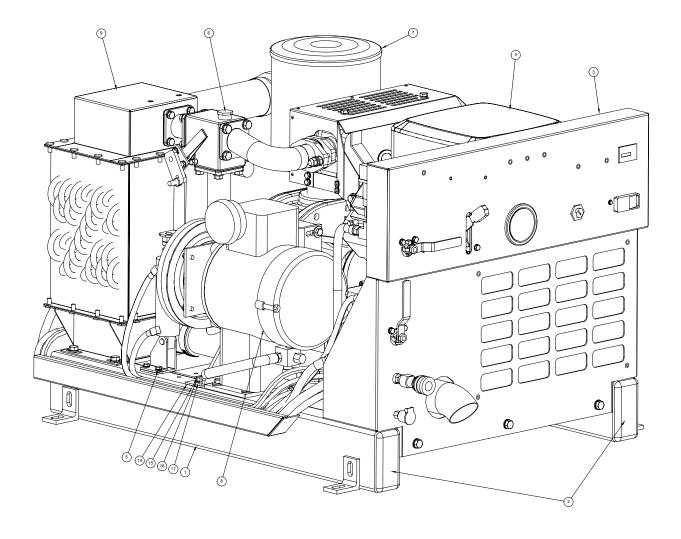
Frame Assembly - Front Right View D-6151 Rev -
